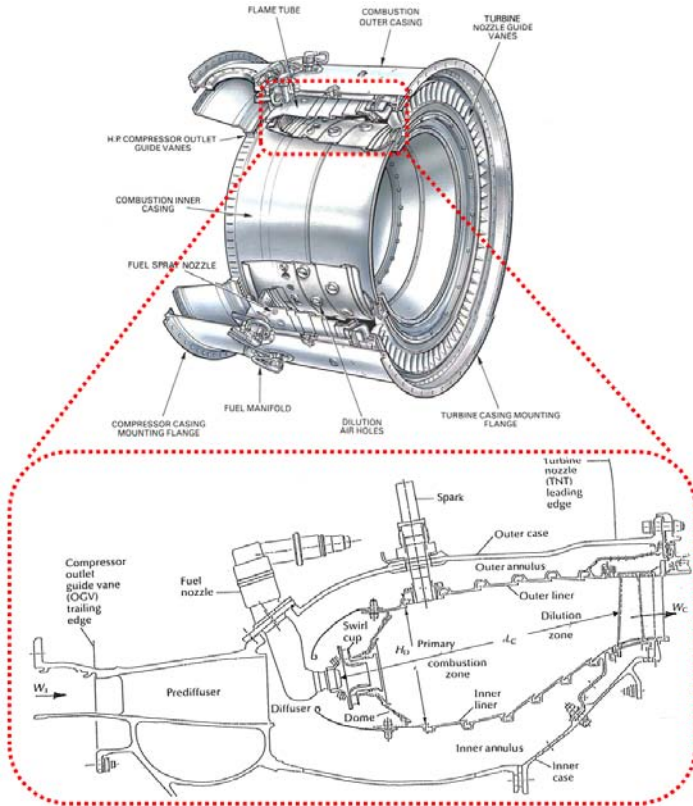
Example of an annular combustor chamber (RR-RB211 [4]) and detailed view on a general layout (GE CF6-80C [3])
